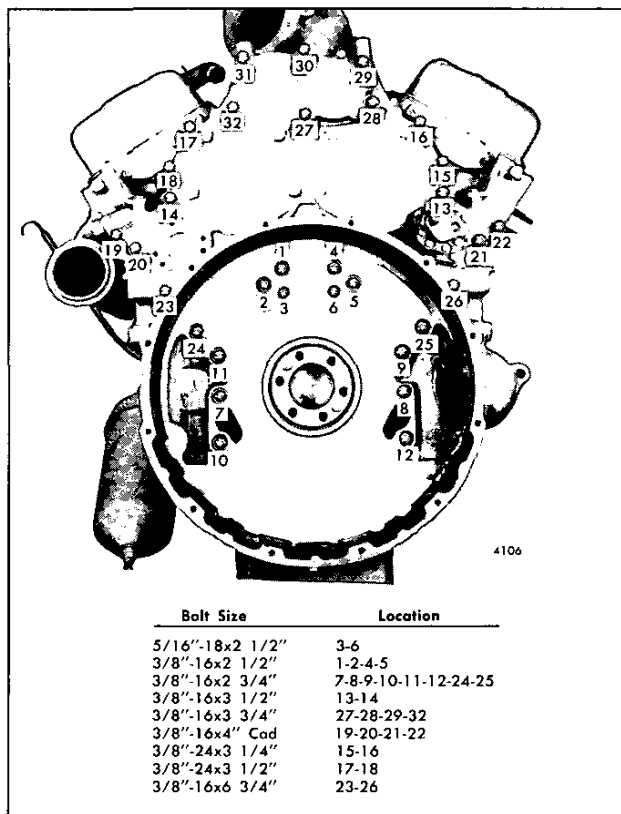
Flywheel Housing Bolt Sizes and Tightening Sequence (Operation 1)—8V Engine
